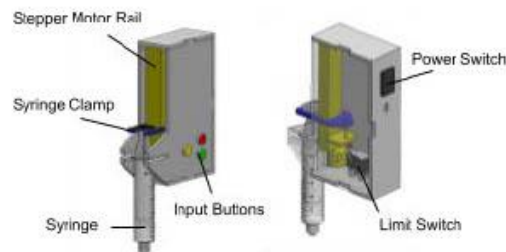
CAD Render of device, with labeled components. Housing is 3D printed PLA.
